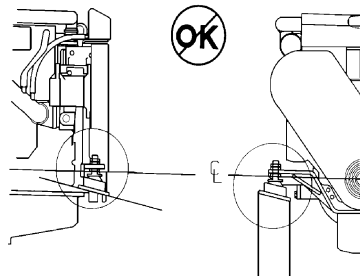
Isolators Must be Parallel to the Crankshaft Centerline Fore and Aft
